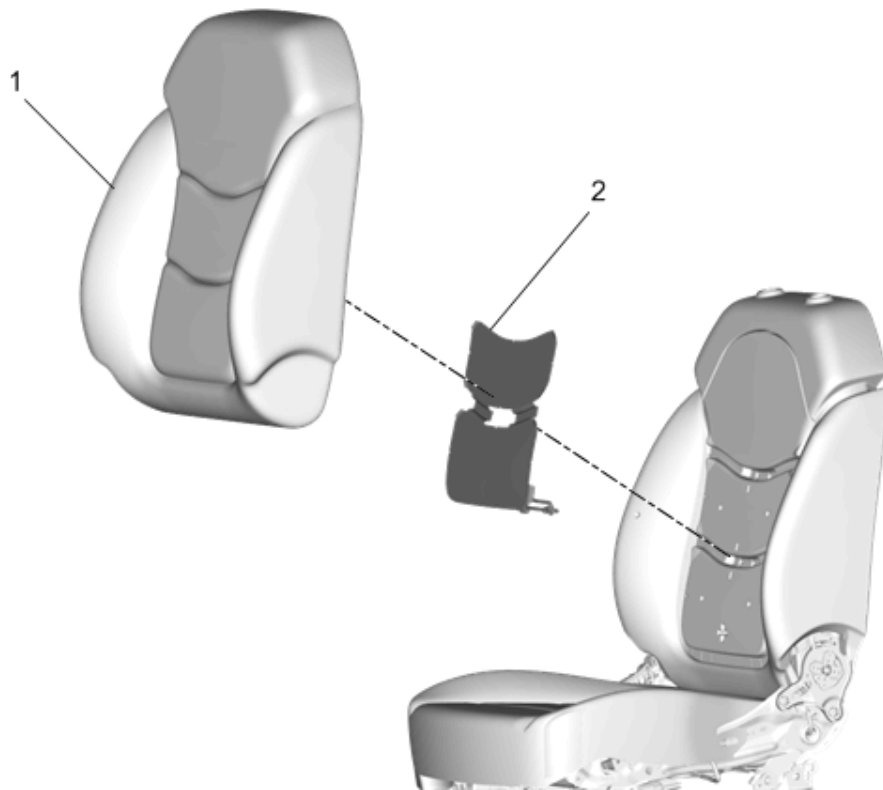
Driver Or Passenger Seat Back Cushion Heater
